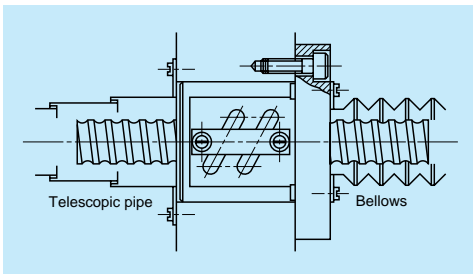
Dust prevention by telescopic pipe and bellows
